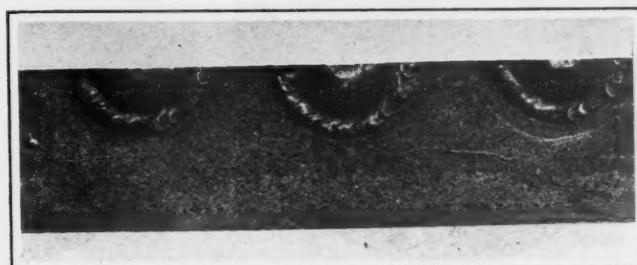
Appearance of Welds when Rivet Heads have been welded to Plate by Electric Arc Welding
